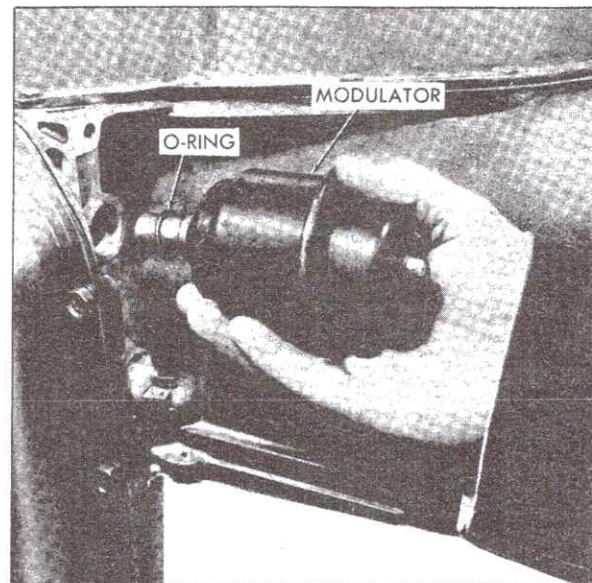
Removing Vacuum Modulator and O-Ring
